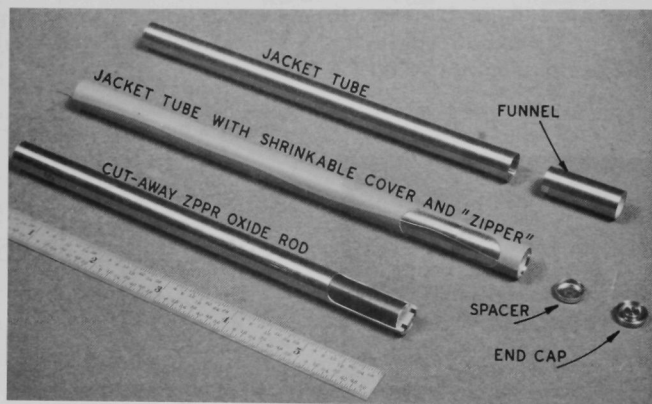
Exploded and Cutaway Views of ZPPR Oxide Rod Elements
